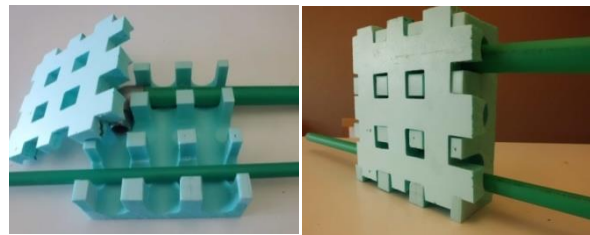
Component manufactured XPS (CNC hotwire cutter 2D)
